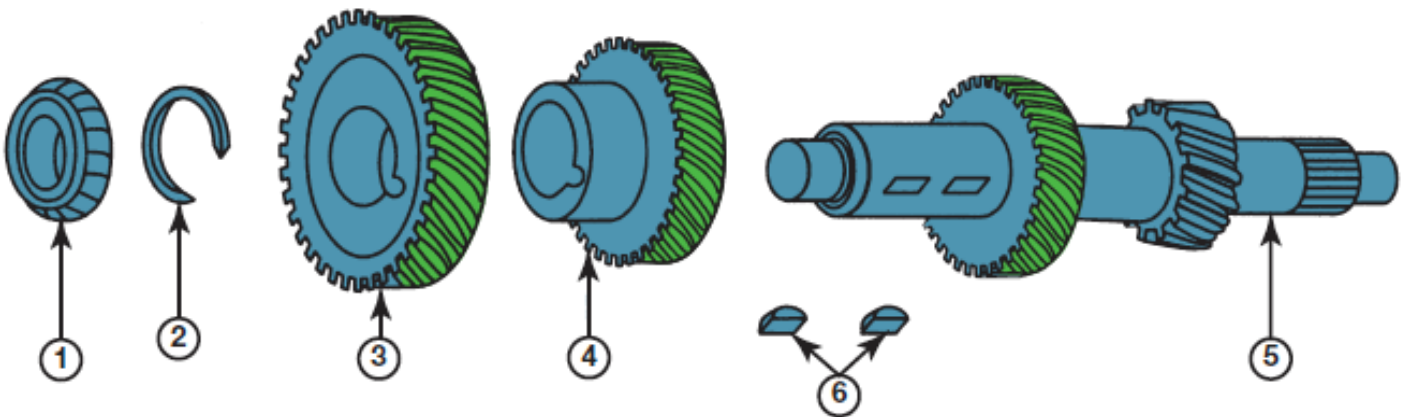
A three-piece cluster gear. Bearing (1), retainer ring (2), press-on gears (3 and 4), cluster gear shaft (5), and woodruff keys (6).
